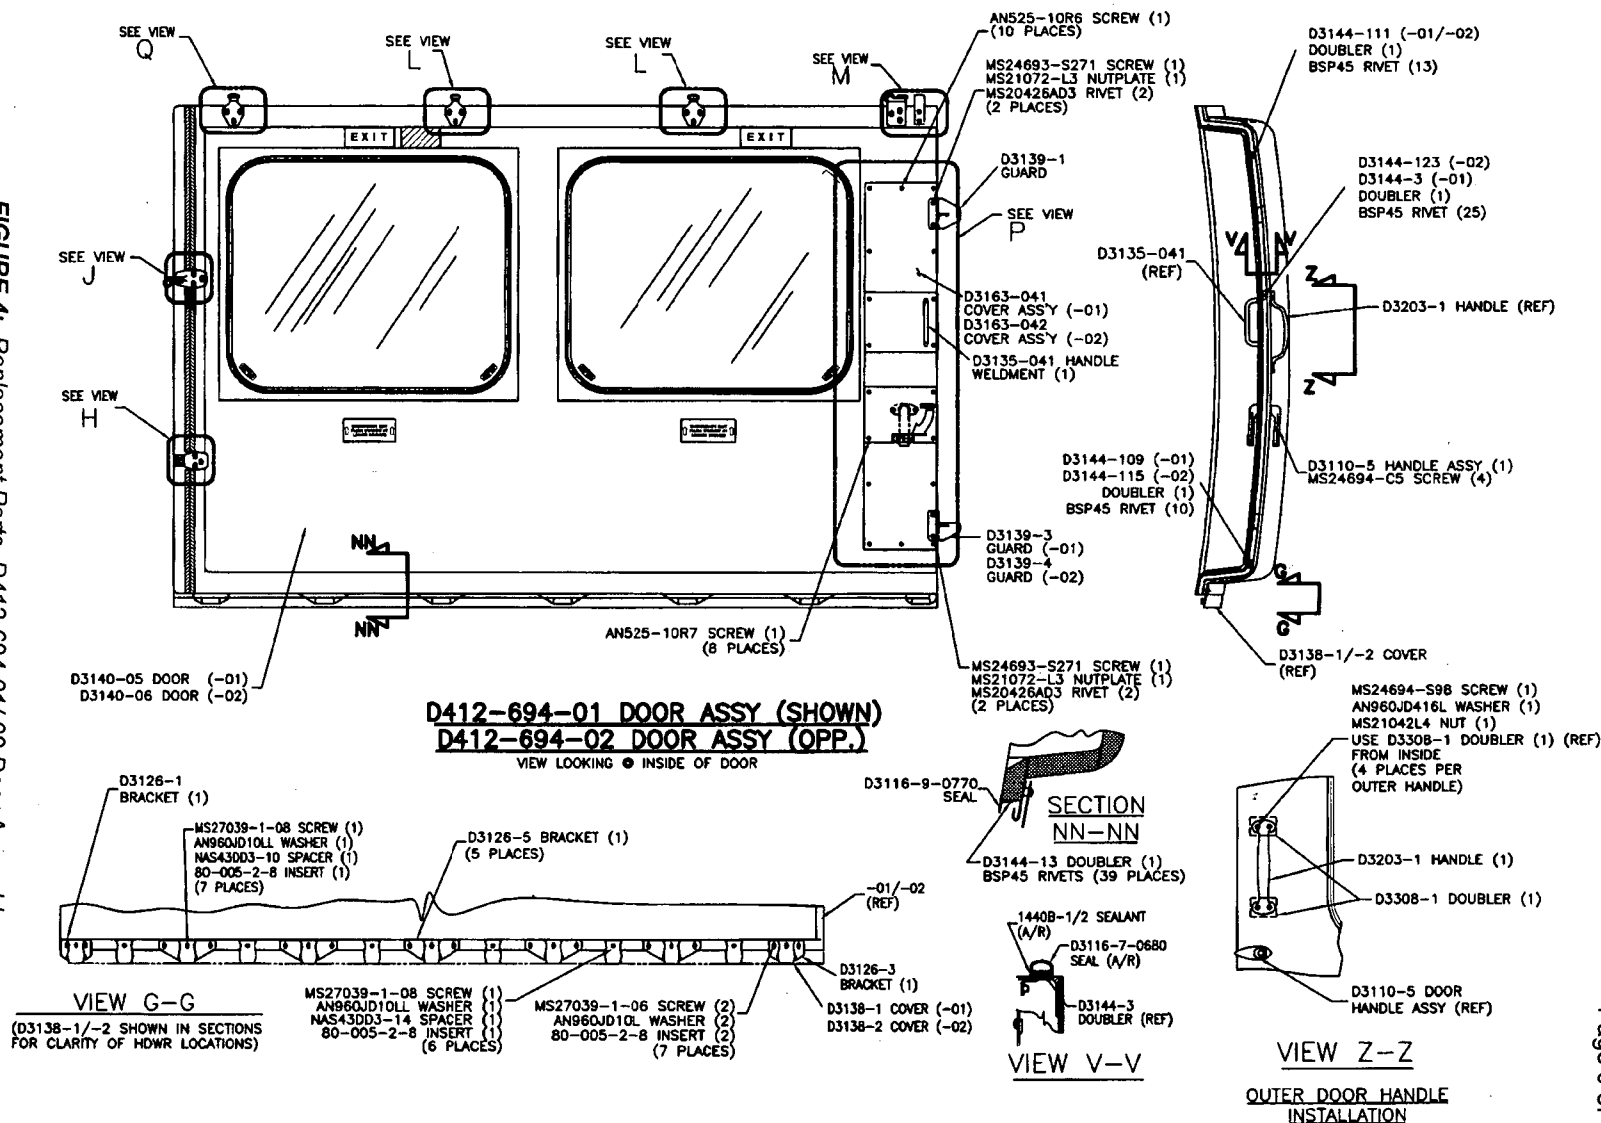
Replacement Parts, D412-694-01/-02 Door Assembly
